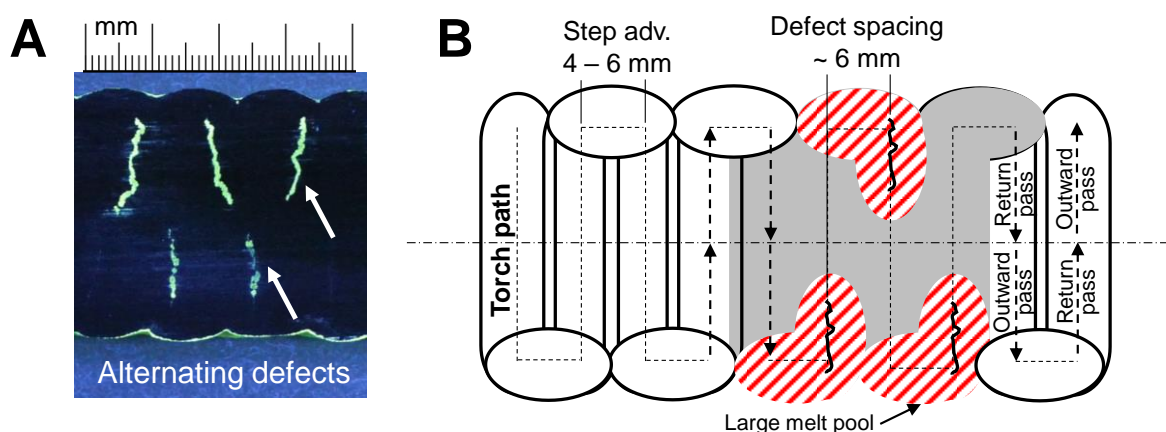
(a) Insert from Figure 4.6 showing alternating defects. (b) Schematic of possible hot and cool zones resulting from the oscillating tool path, leading to alternating defect pattern.
